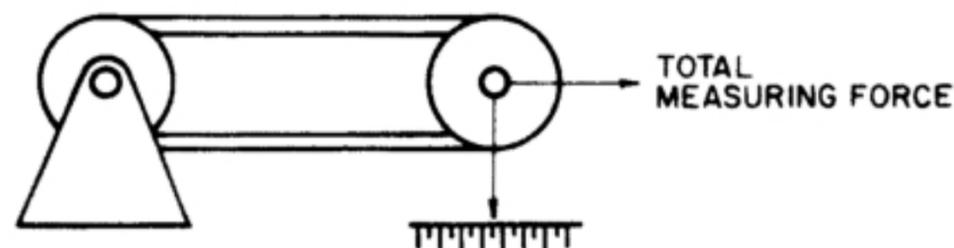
Diagram of a fixture for measuring V-ribbed belts
